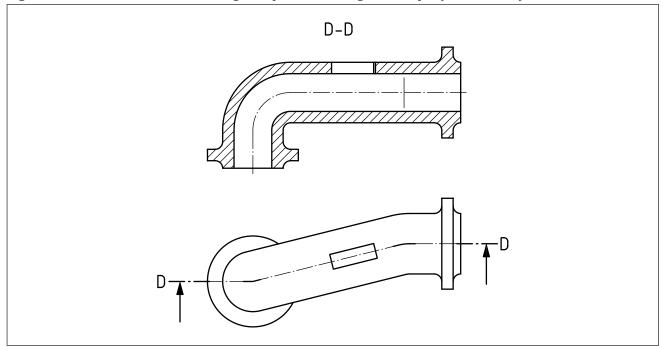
Section view in three contiguous planes showing true shape of inclined surface
